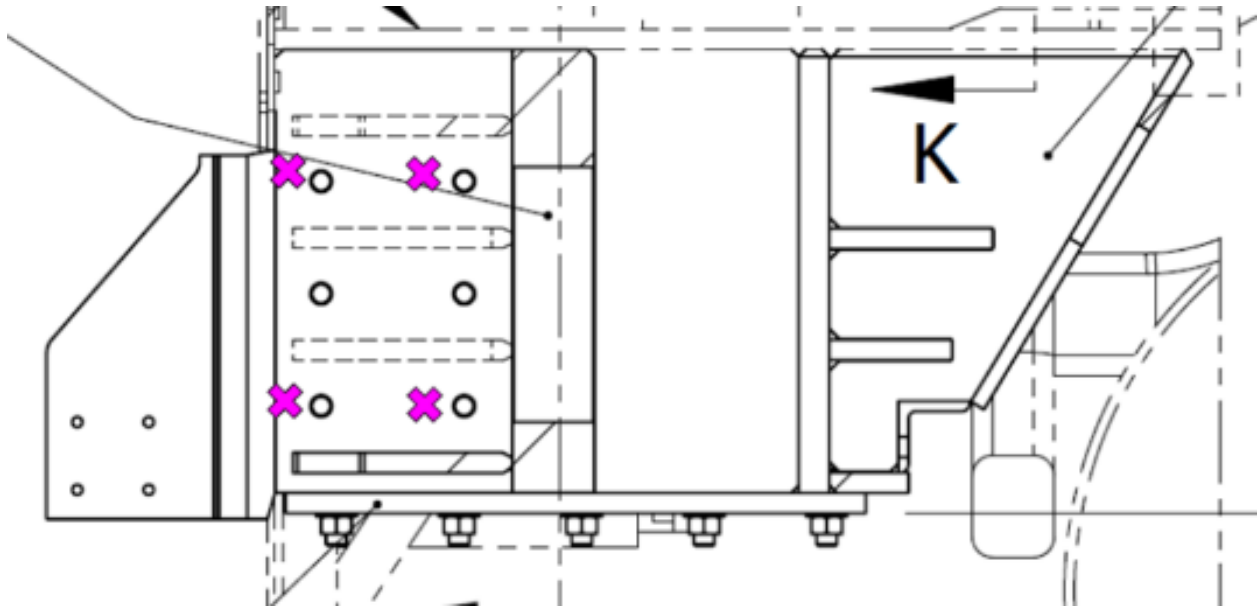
Strain Gage Locations on Mobile Locomotive Sliding Lug
